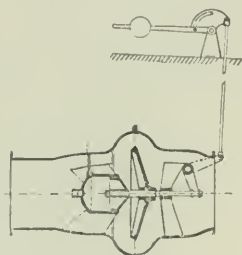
SELF CLOSING VALVE FOR PIPE LINE.
